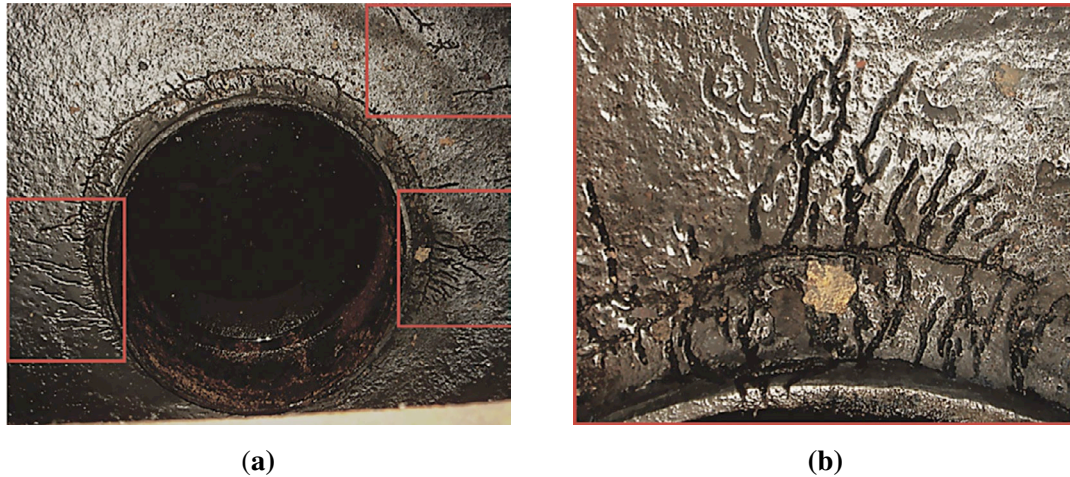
Photo of the weld of the butane heater fitting welding with corrosion damage (a) and an enlarged fragment of the photo (b).
